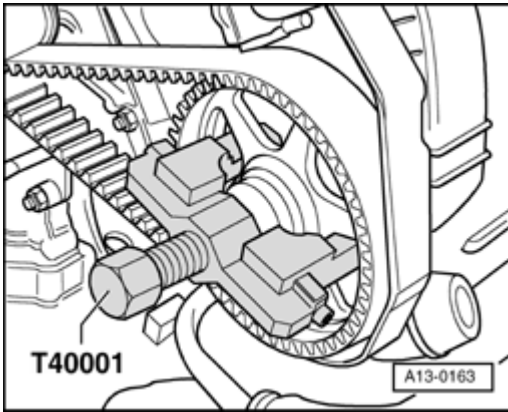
Removing Left/Right Camshaft Gears From Cone Using Puller T40001 With Claw T40001/2
